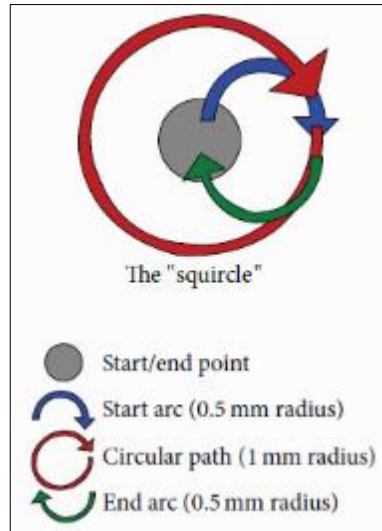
Schematic illustration of weld path of swing FSSW (Yang et al., 2014)
